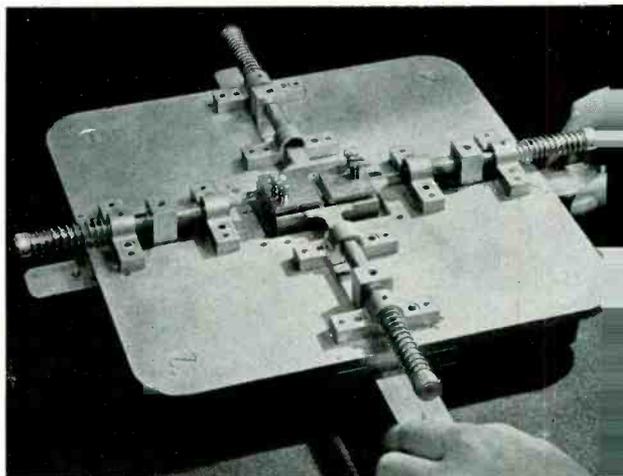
Centering tool for positioning an EDT plate inside its holder
